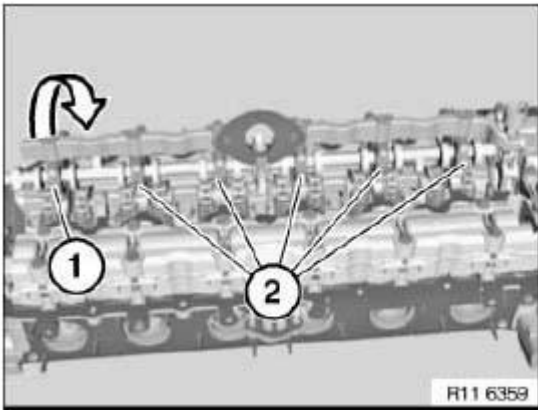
Identifying Bearing Caps And Bearing Cap Number
